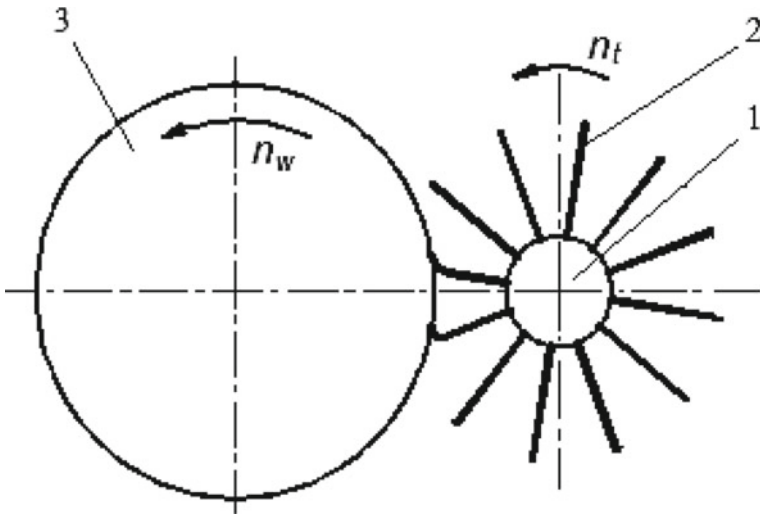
Schematic representation of the polishing process using rotating brushes with abrasive blades: (1) the shaft of the rotating disk driven in a rotational movement with speed n_t ; (2) abrasive blade; and (3) workpiece in rotating motion; n_w —the rotational movement of the workpiece (Adapted from [16])
